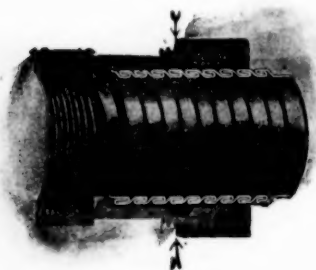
CROSS SECTION TUBING AND CONNECTION.
